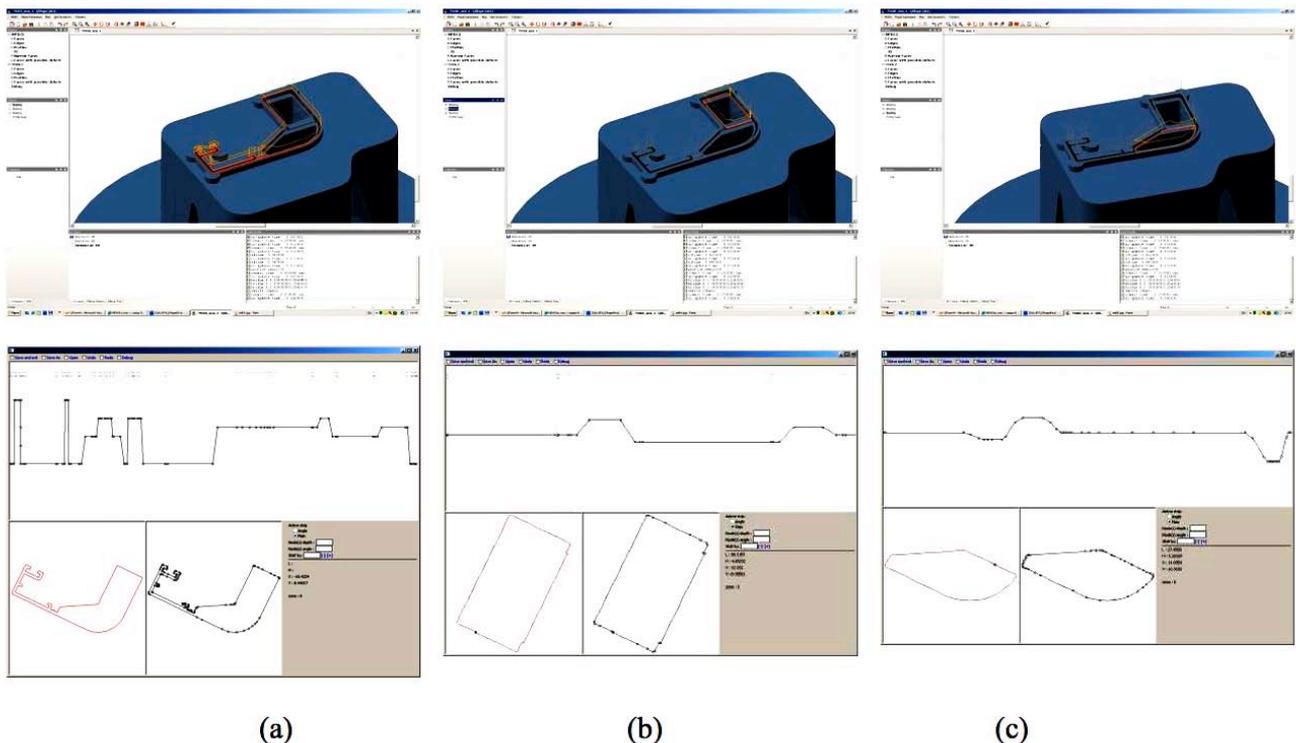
The evolutes of outer (a) and inner (b, c) bearings of a hollow angular profile displayed in Bearing Editor.
